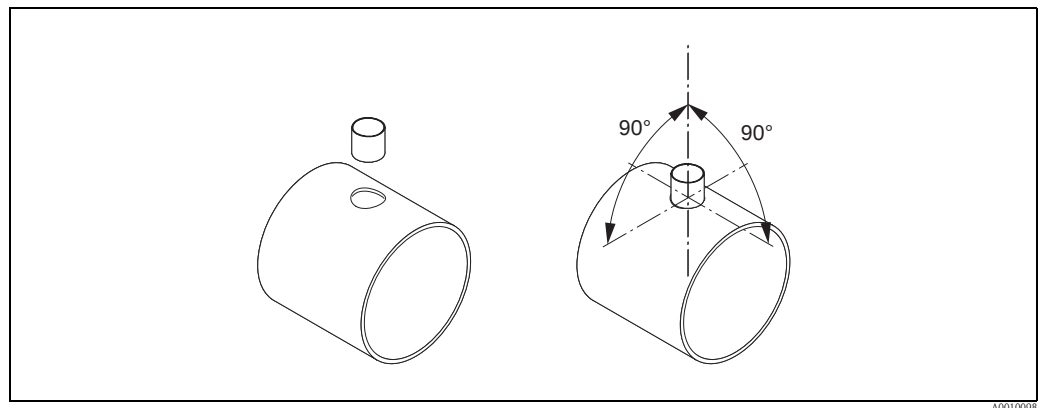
Positioning the welding socket on the pipe (or duct)
